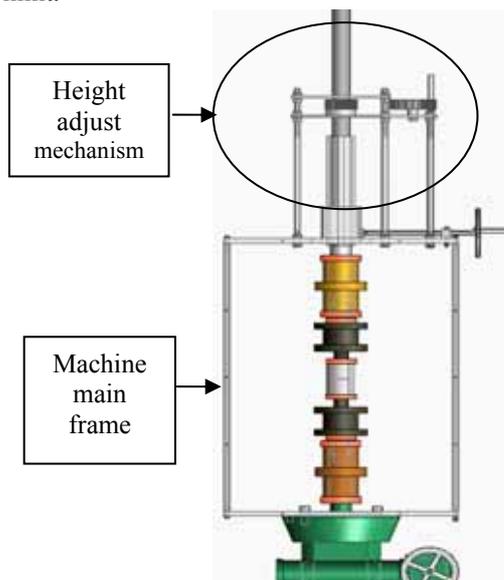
Machine main frame and height adjustment mechanism together with the basic standard components.
